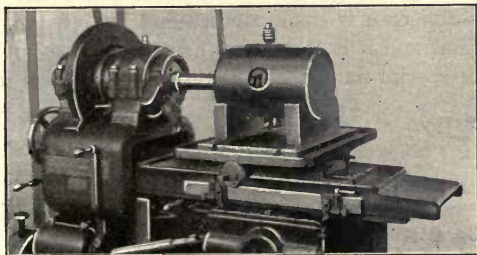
Grinding a hole in a piece of tile pipe on a Heald cylinder grinding machine.
